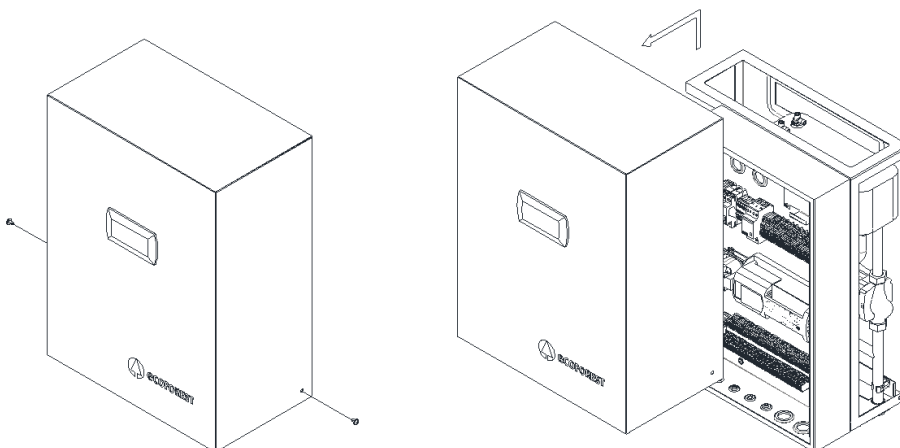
Disassembly of the cover of Hidrokit indoor units.
